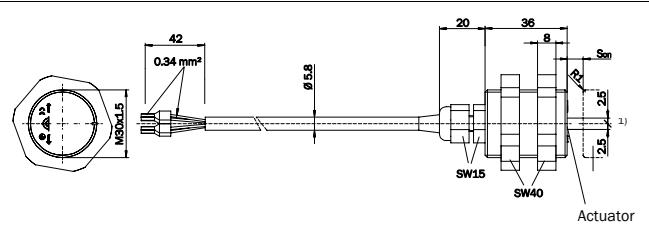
Dimensional drawing RE31-DA.. magnetic safety switch read head
